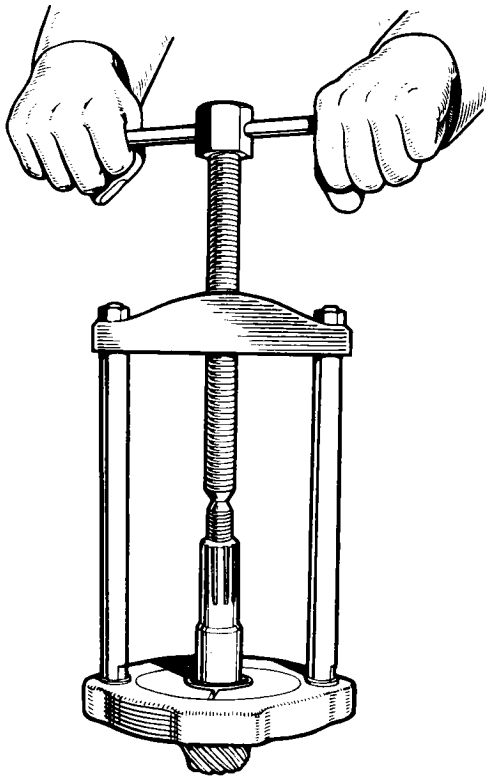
Withdrawing the pinion inner bearing inner race using Churchill tool SL. 14 with adaptor SL. 11 P|AB-2
